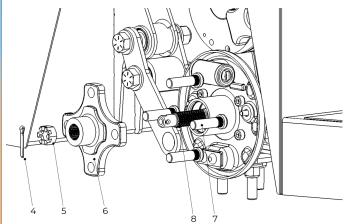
Cotter Pin - Castle Nut - Hub and Spindle Removal.
